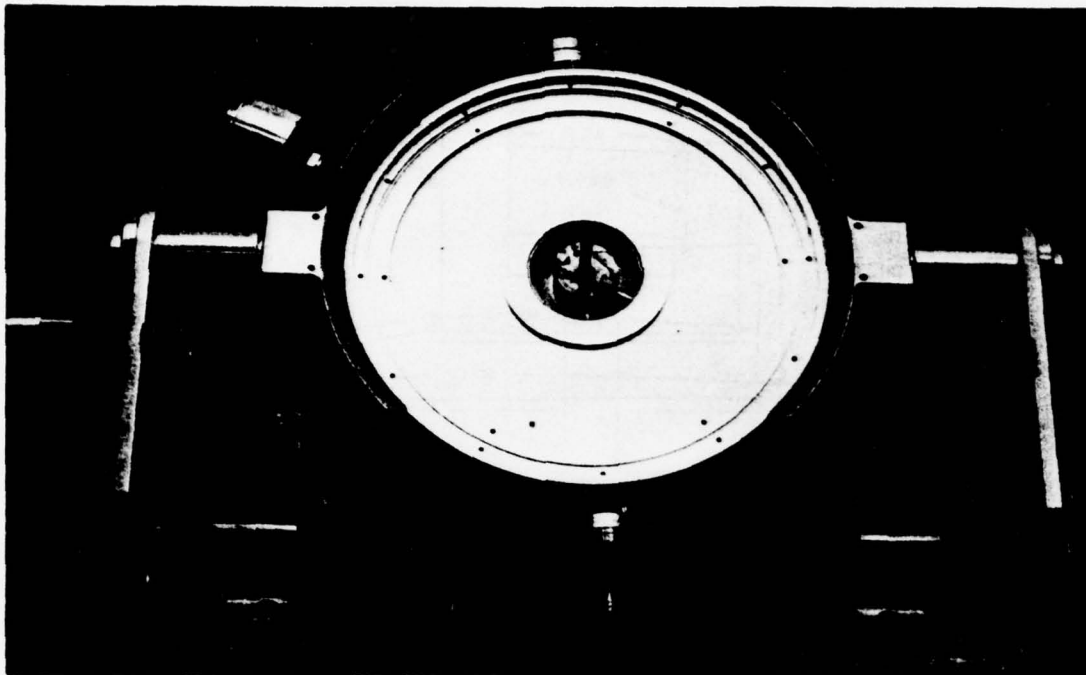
Top View of Main Baseplate and View of Holding Fixture
